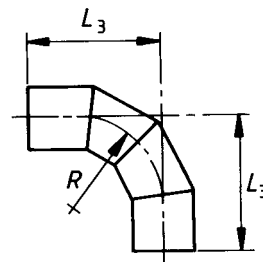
Gusseted bend type 3, over 60° up to 90°
